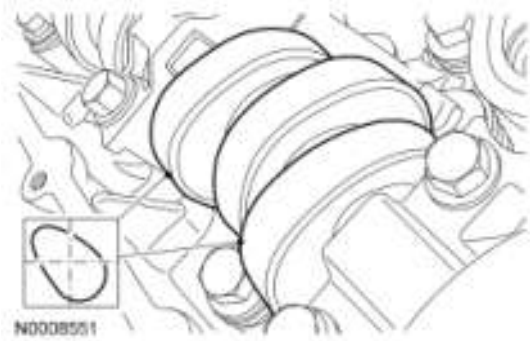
View Of Crankshaft Sensor Ring At Crankshaft
